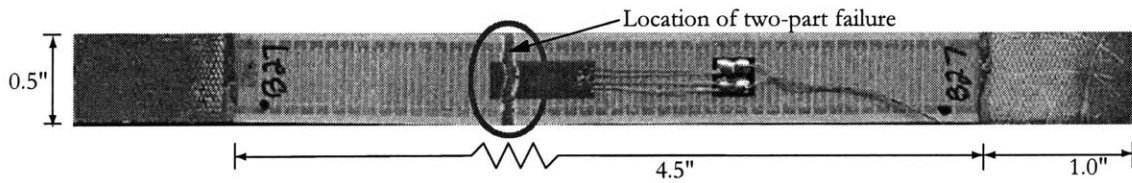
Two-part failure of B27 under the extended mechanical fatigue test
